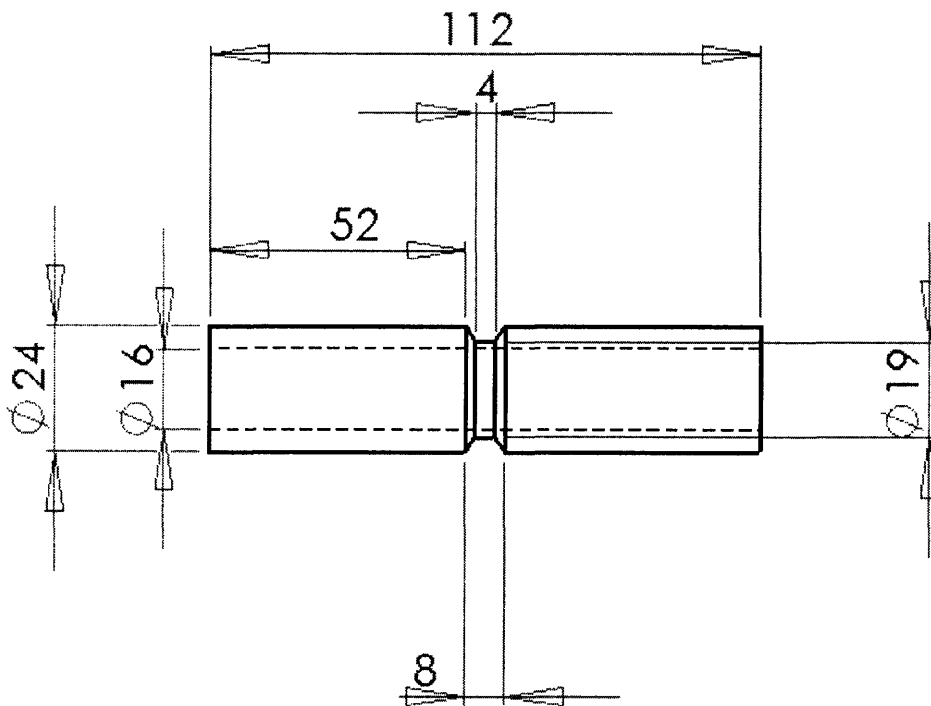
Dimensions of torsion specimen. All dimensions are in millimeters.
